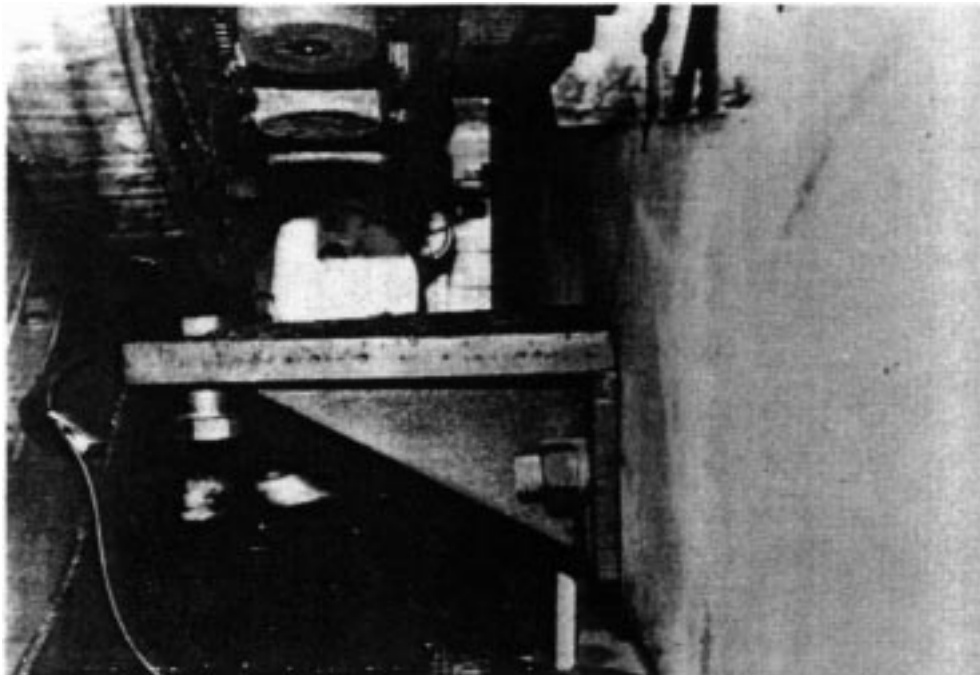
Mechanical Support for Lower-Half IGV Actuator Ring.
